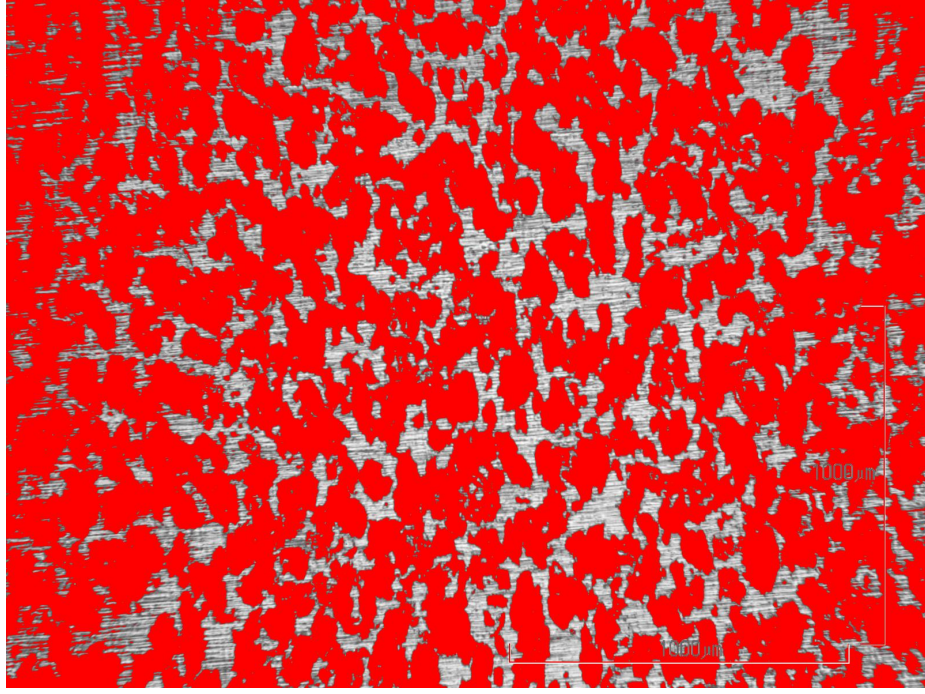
UAM 3-2 sample 8 fracture surface after image processing, red regions are bond fracture surfaces.
